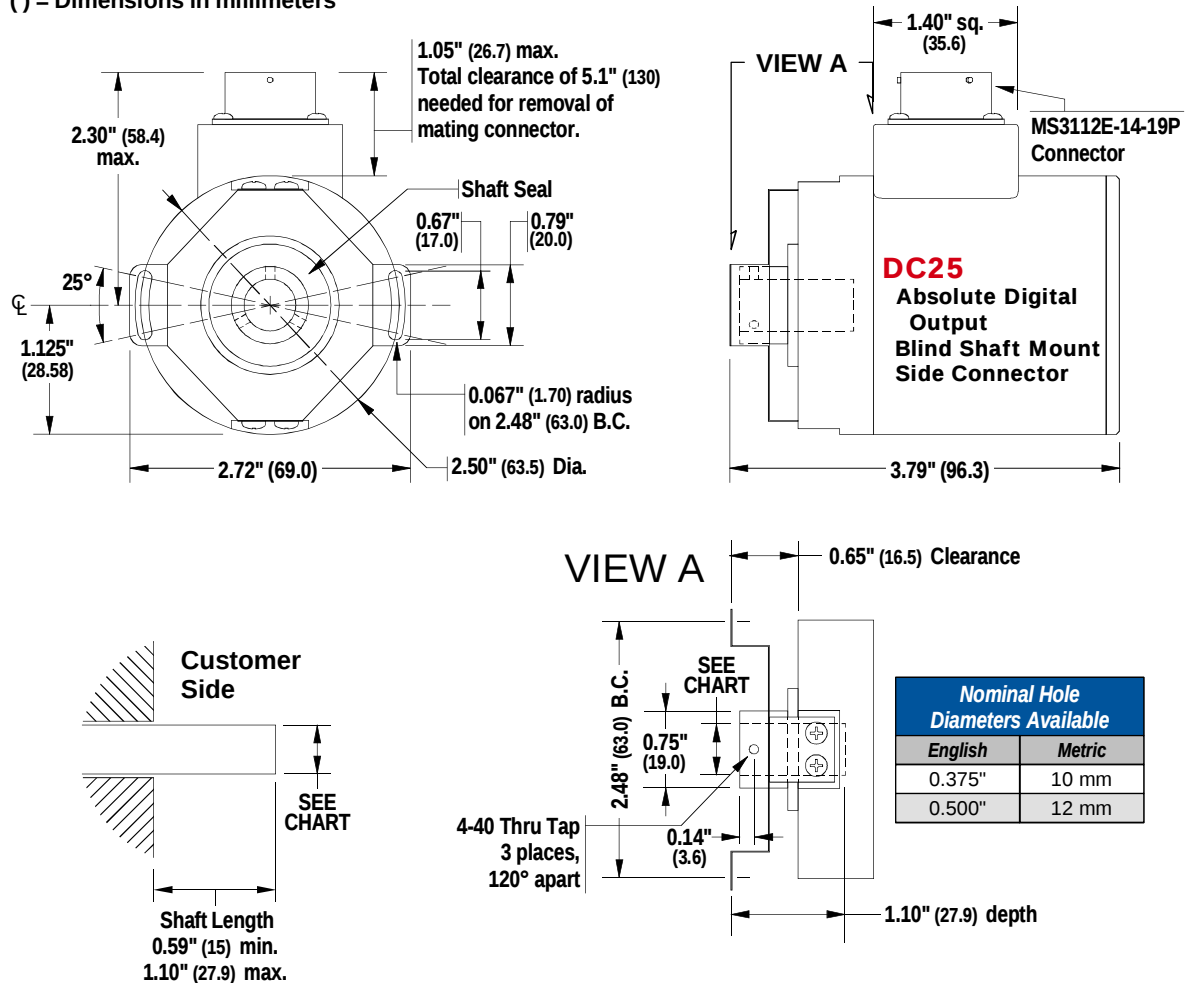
Blind Shaft Mount, Side Connect Outline Drawing
